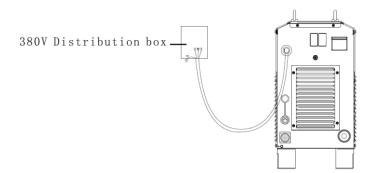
Schematic diagram of connections for welding power source side input cable
